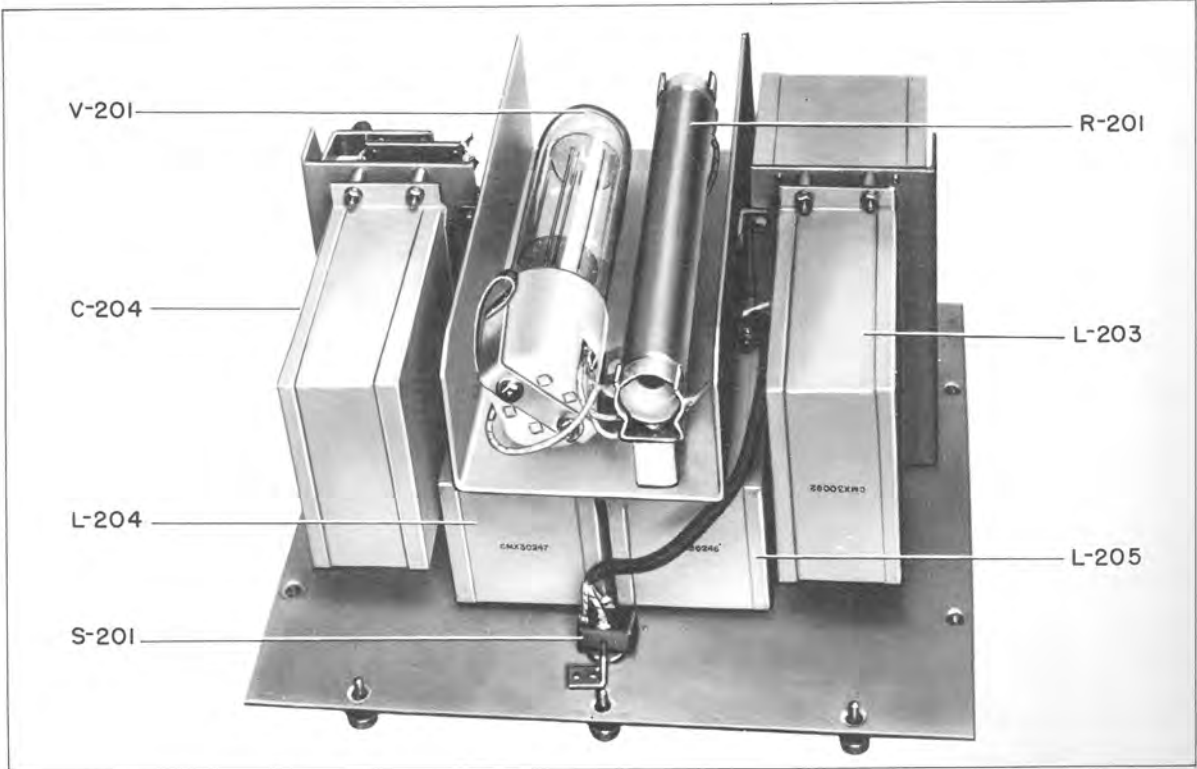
Power Unit CMX-20131-A (Bottom View of Chassis)
